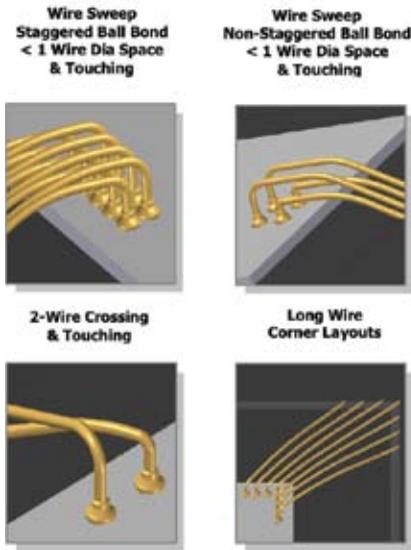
Example layouts and design rules for acceptable insulated bonding wire packages.
